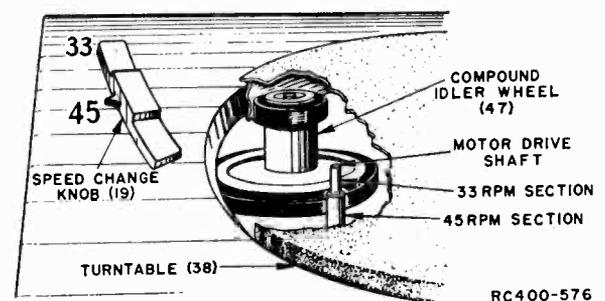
Compound Idler Wheel and Motor Drive Shaft.
